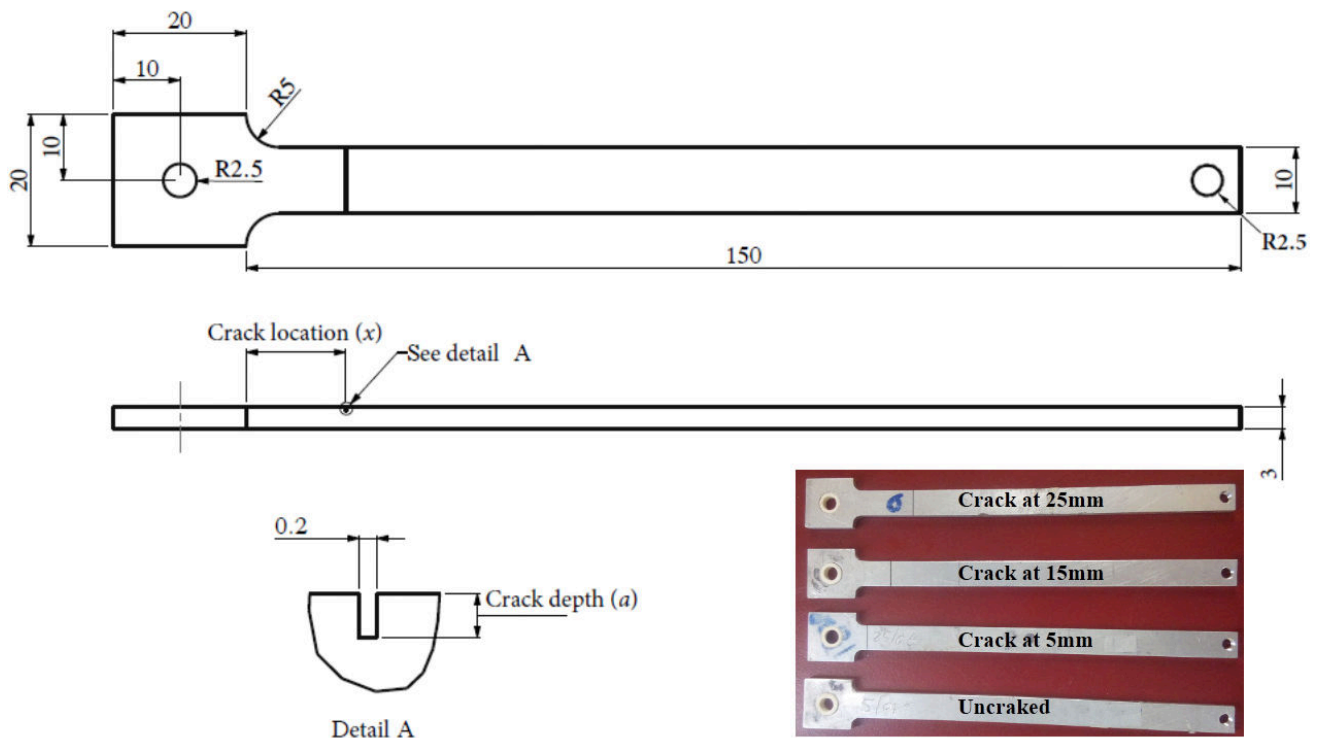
Dimensions of the specimen (in mm), inset is showing the manufactured specimen.
